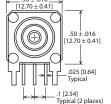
B24-31: Concentric Shafts, B24, 3 Potentiometer(s) or RS + MP, 1/4" Bushing Section 1, 2 & 3 Potentiometers or RS on Outer Shaft Section 4 Momentary Push Switch on Inner Shaft
